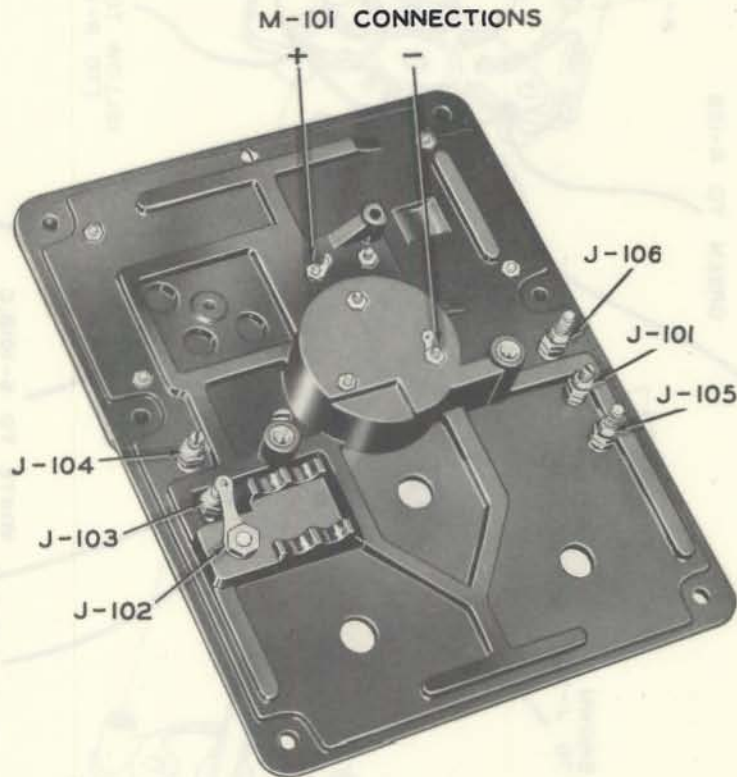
Components Assembled to Back of Front Panel, Multimeter ME-48A/U.
